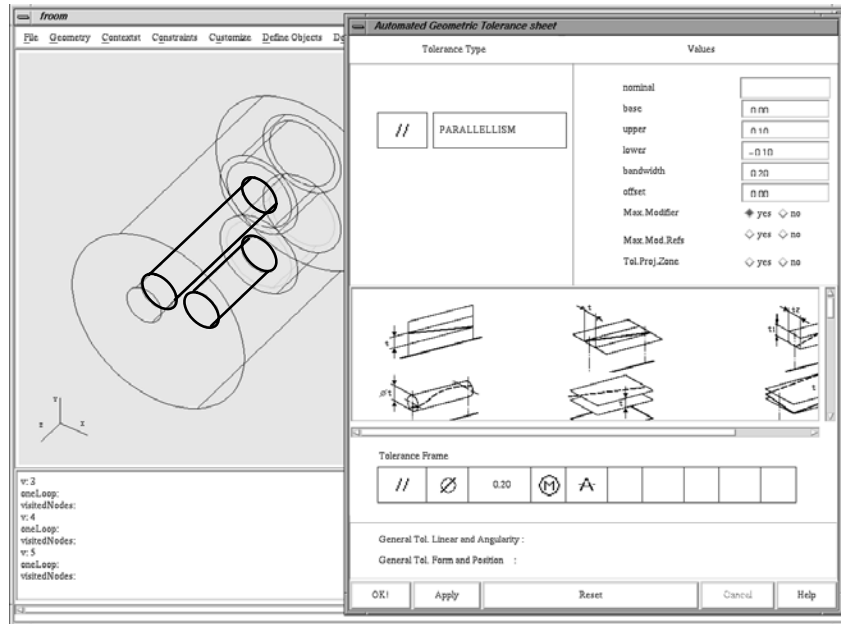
The system proposes a parallelism tolerance between the two gear holes.
